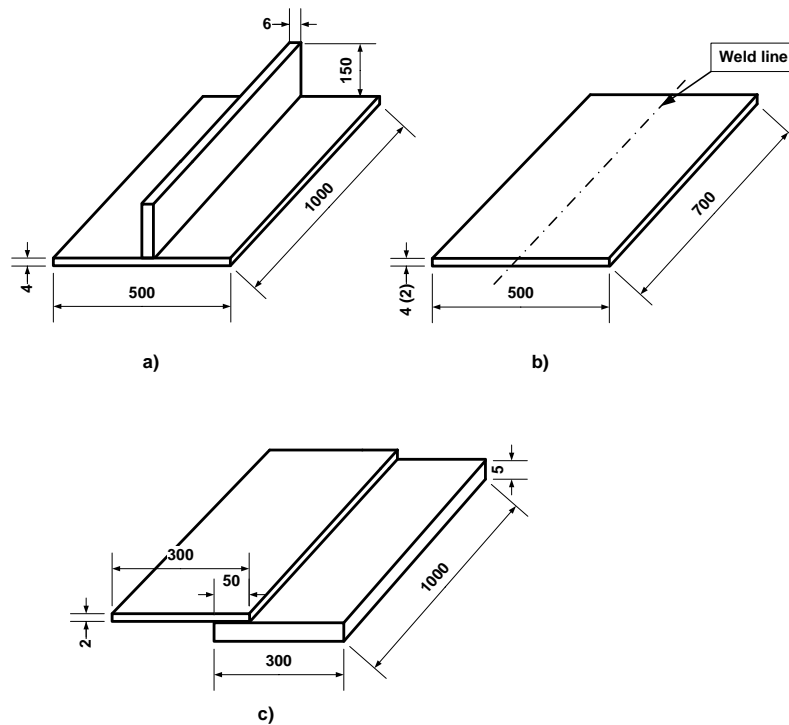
Specimen geometries used in the TTH calibration and welding experiments a) fillet welds b) 4 and 2 mm butt welds c) overlapped welds
